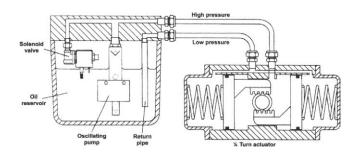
A hydraulic opposed piston quarter turn actuator Courtesy of Rotork Controls Ltd
